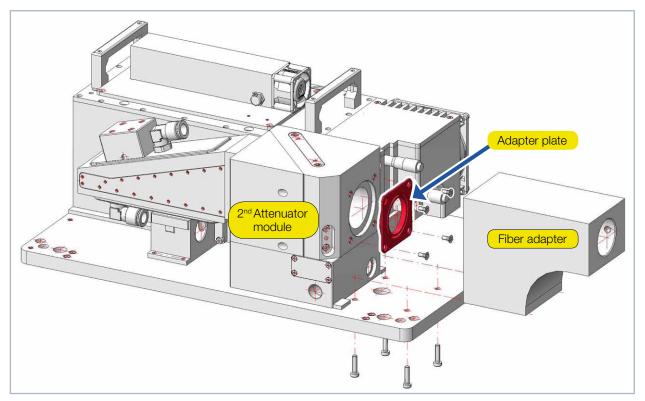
Install a Fiber Adapter with the Adapter Plate
